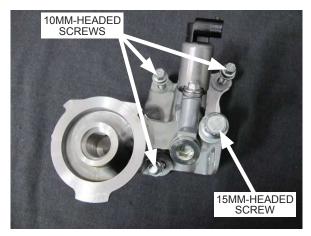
j: Remove Oil Filter Mount (Removed From Vehicle For Clarity)
